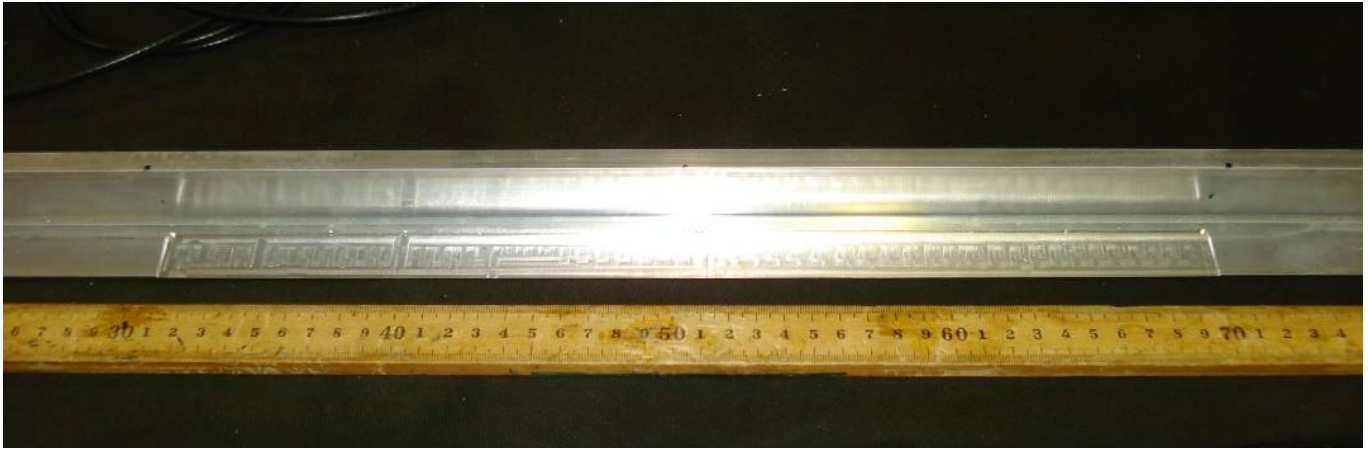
The milled test section on a 1.0m “T” stringer at the end of the incremental milling test (top). Taking a close-up look at the test section, the grooves produced by the milling machine can be seen. The initial thickness of the stringer was 1.6mm, which was then reduced to 0.5mm by the end of the test.
